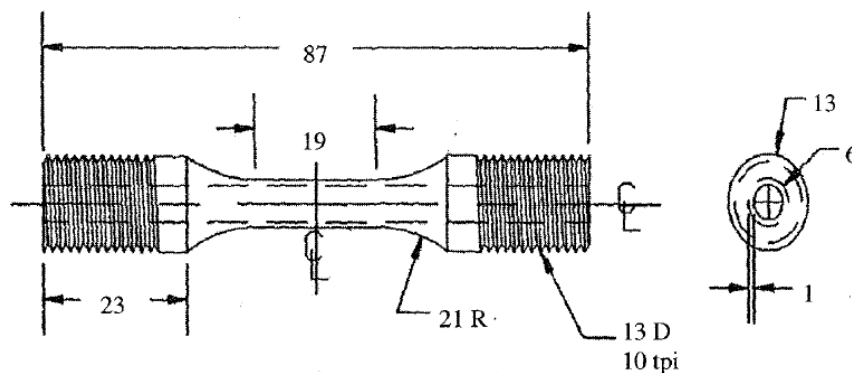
Samples of Thin-Walled Tubular Specimens for TMF Testing, Cylindrical threaded shank [2].
